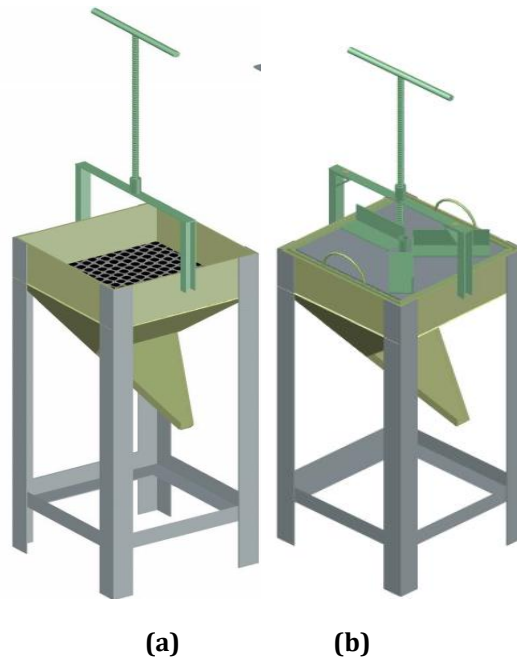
(a) Isometric view of the wall panel moulding machine (b) Wall panel moulding machine with the counter mould
